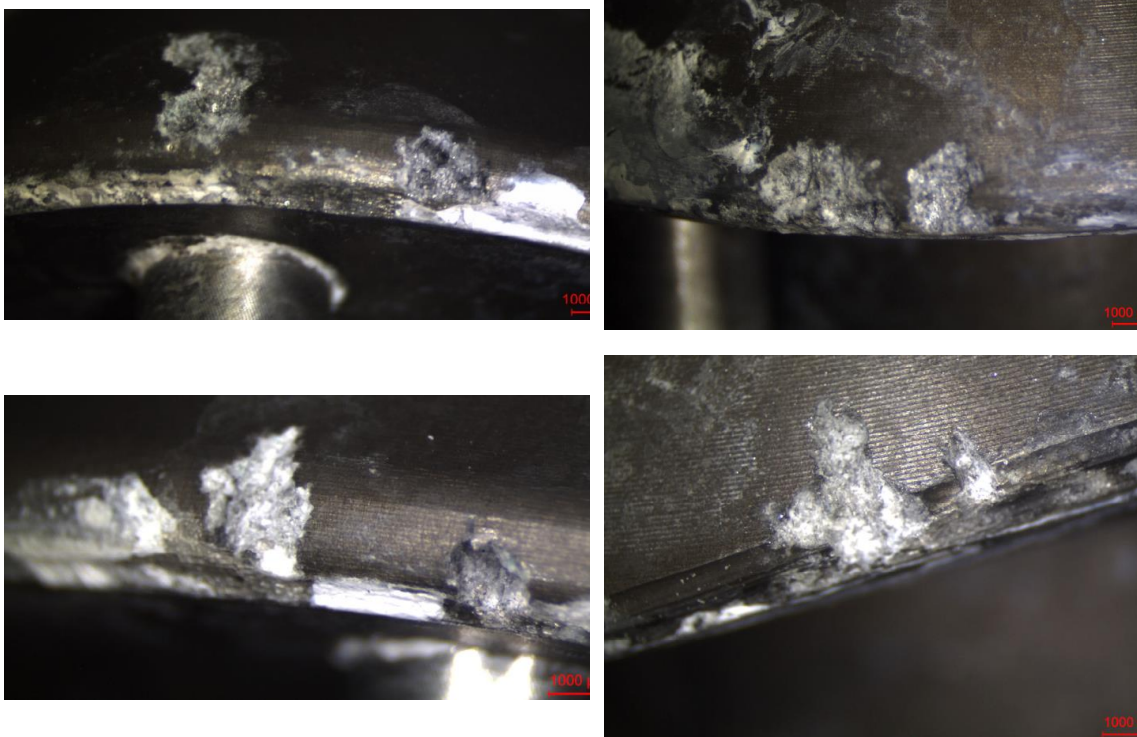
pitting corrosion on the edge of the inserts observed with a stereo microscope analysis
